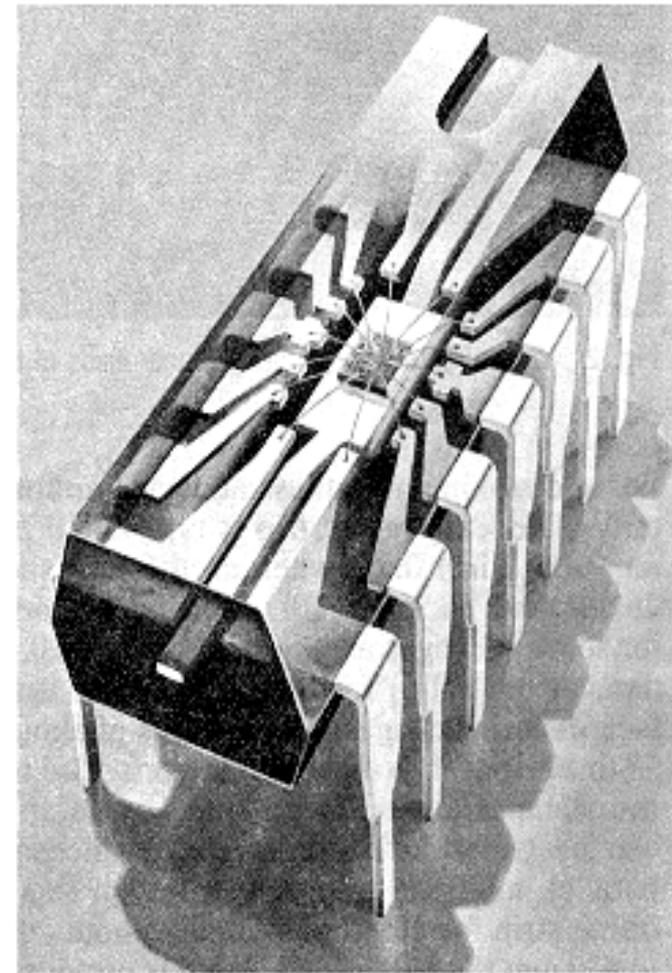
View of lead frame positioning in postmolded nonhermetic package showing wire interconnects from chip to inner leads of lead frame
